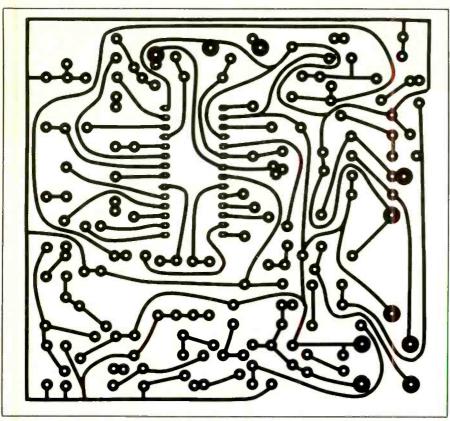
Actual-size etching-and-drilling guide to use when making your own printed-circuit board.
